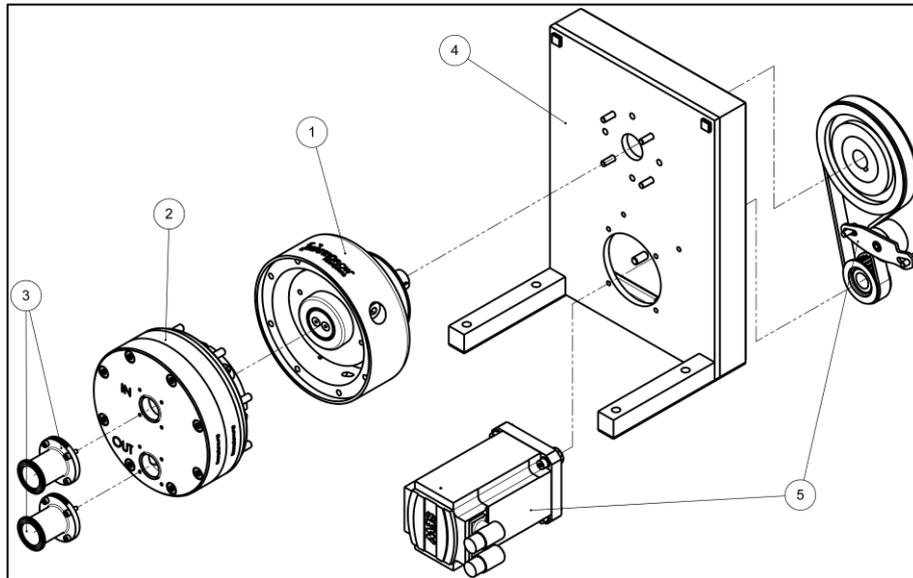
Sub-assemblies QF5KCD - QF5KCD-ACUHG
